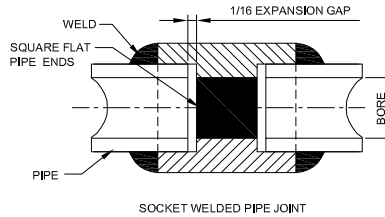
Socket Welded Pipe Joint
